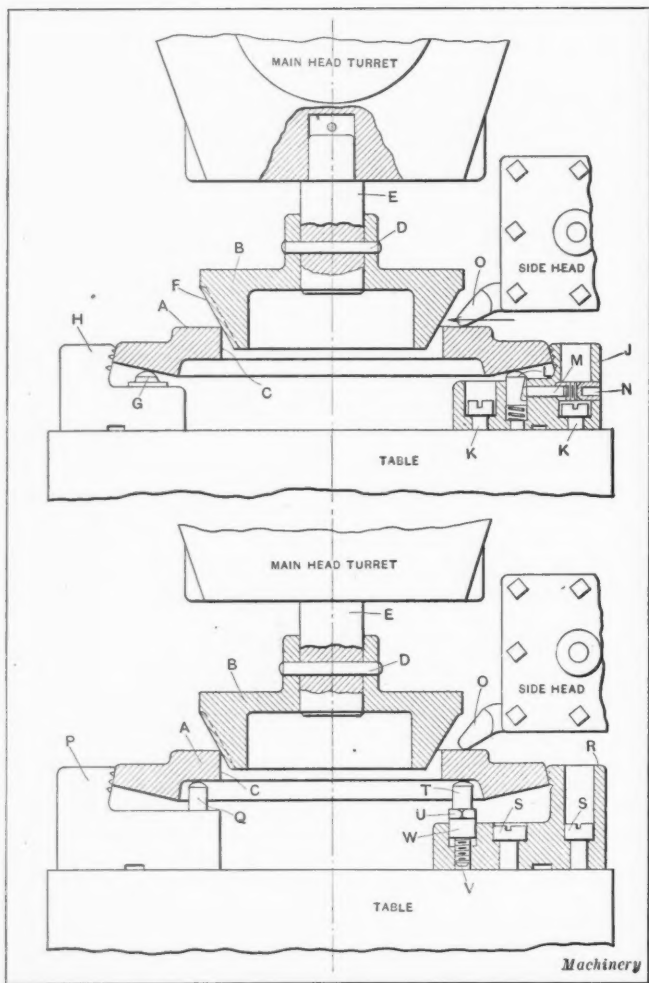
Two Methods of holding Bevel Gear Blank; the Method shown above gave Trouble through Slippage of Supporting Pins on Beveled Surface
